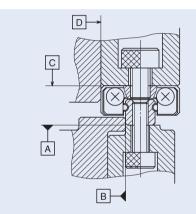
Reference mounting surface and general mounting structure of LWL2 or larger
